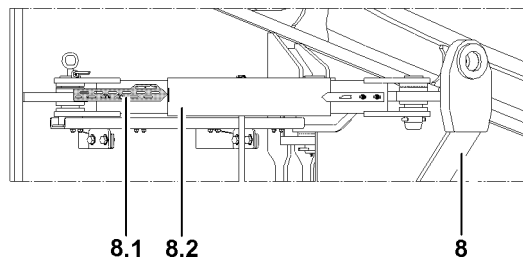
Adjustment of adjustment sleeves for lifting the complete crawler carrier
